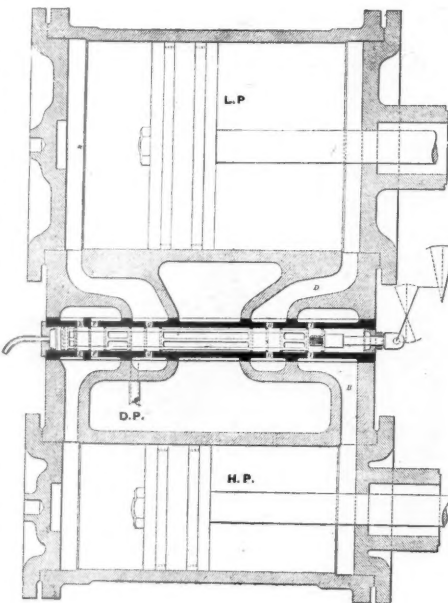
Cylinder Cocks Closed, Starting Valve Closed and Engine Working Compound
